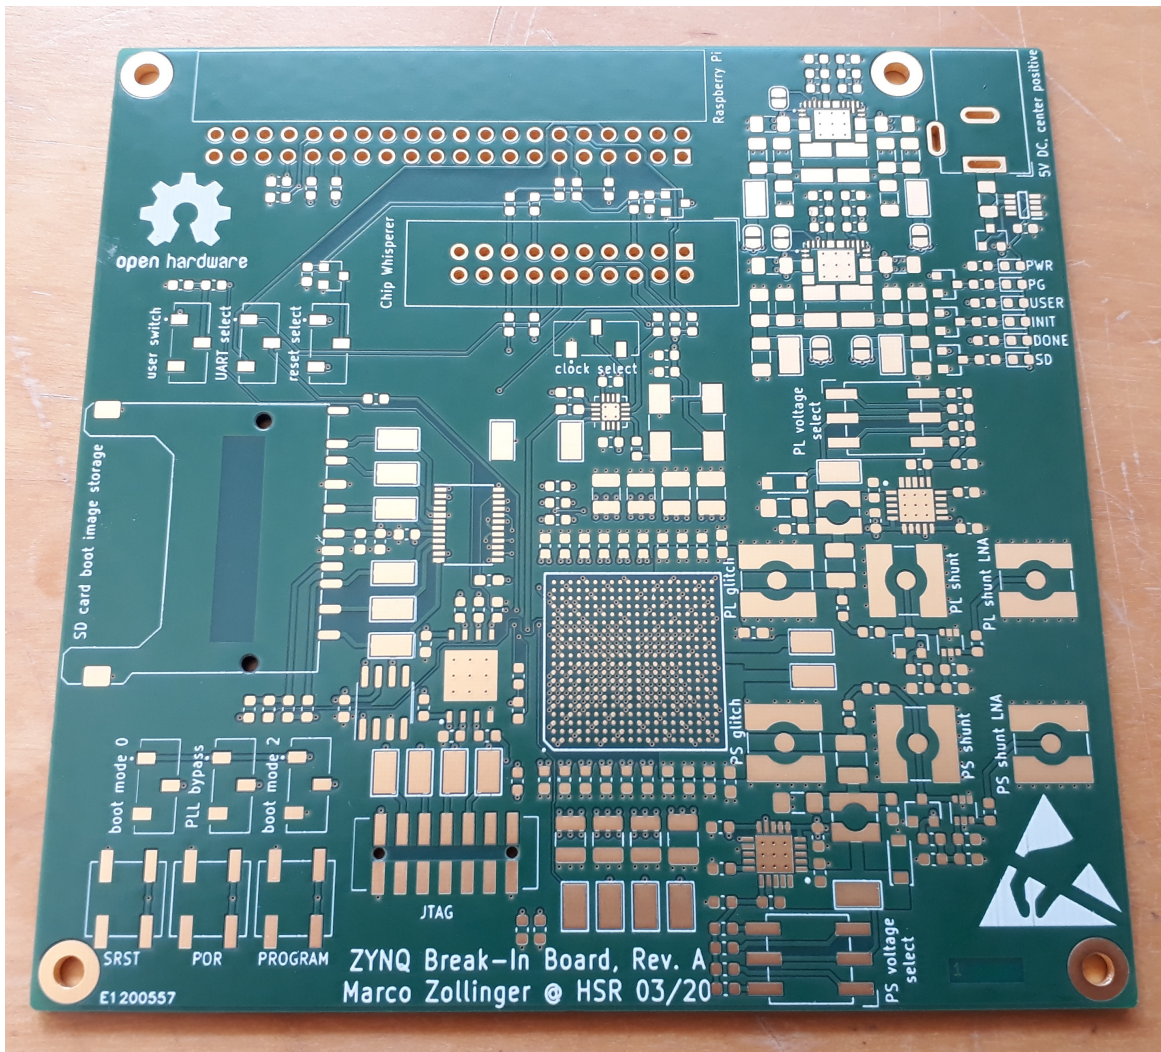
ZYNQ Break-In Board: PCB From Manufacturer
